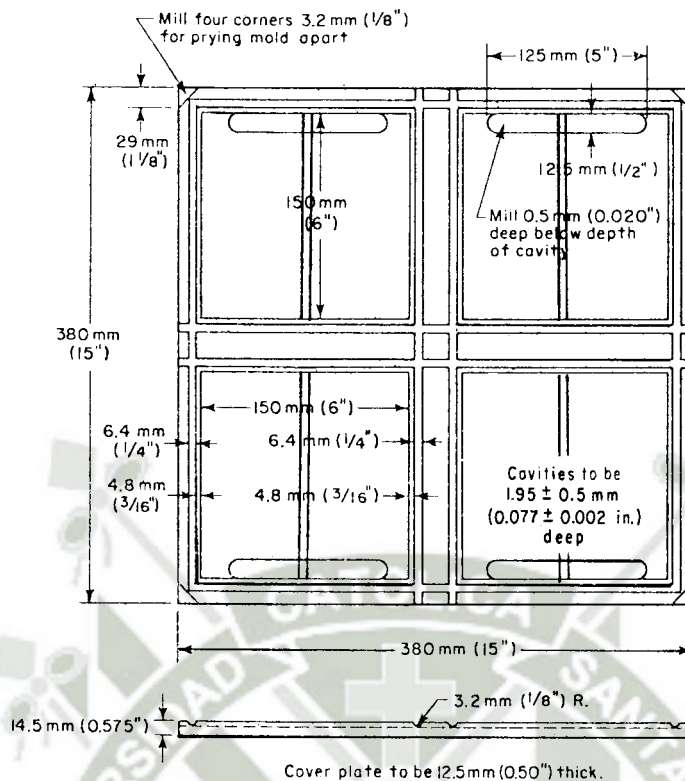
Design of Eight Cavity Mold, for Small Tensile Sheets Made by Modifying the Mold Shown in Fig. 1
